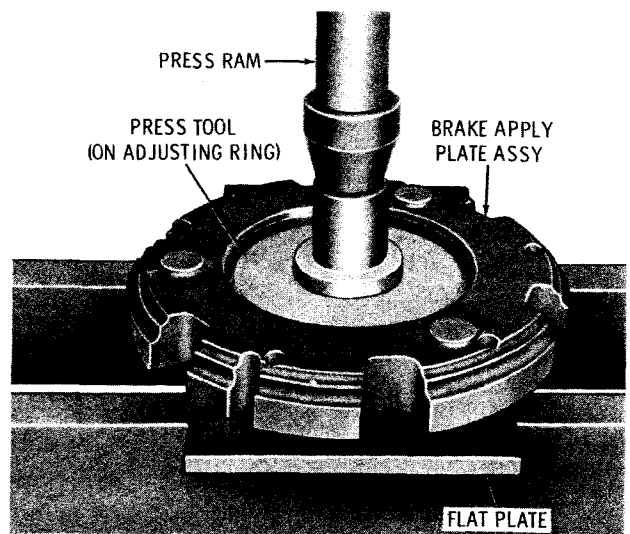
Pressing brake adjusting ring flush with apply plate surface
